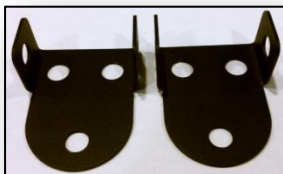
Instructions 1-Channels, 2 Cradle's, 2 adjustable shaft parts, 1 Isolators, 1 chrome rings, Hardware.
